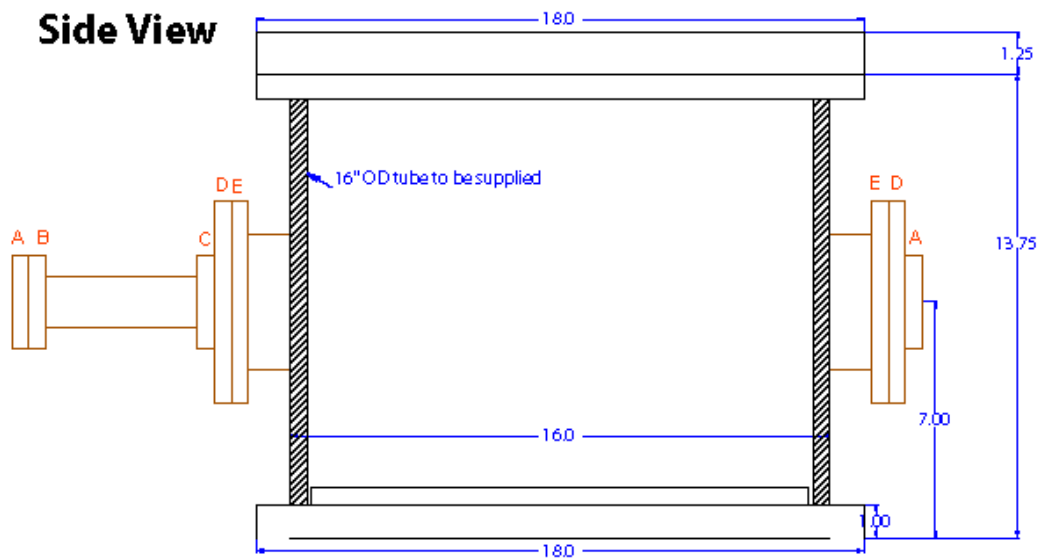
Drawing showing the design of the aluminum vacuum chamber using in my experiments. All units are expressed in inches.
